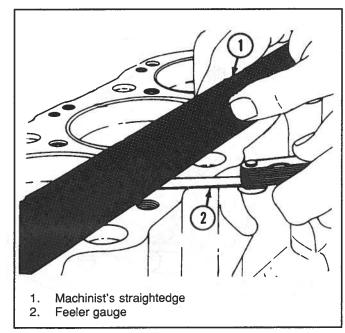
Checking Cylinder-Block-Gasket Surfaces For Warping
